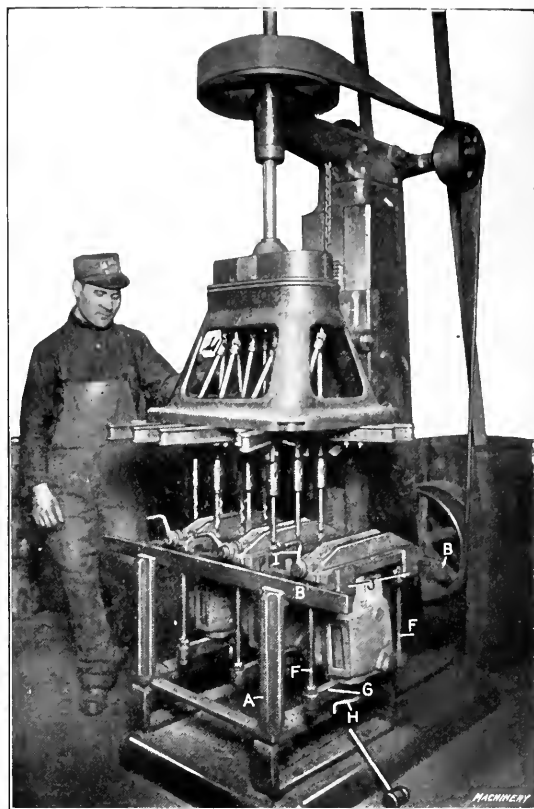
Progressive Drilling and Reaming of Flange Holes in the Base of the Cylinder Casting
